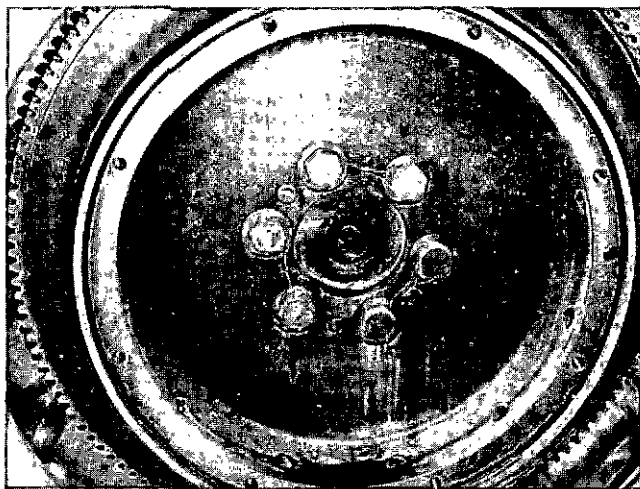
, V414181. Flywheel capscrews lockwired
